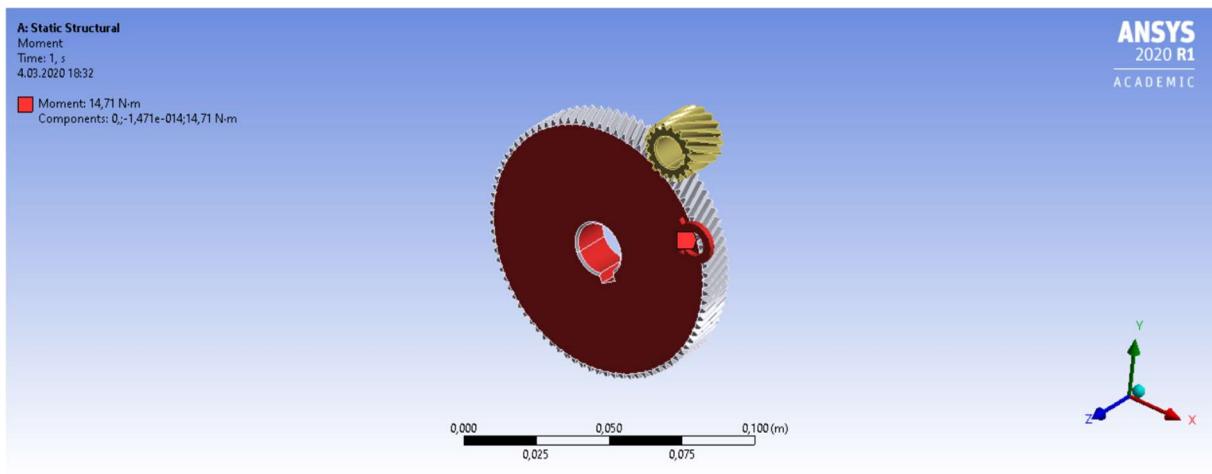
Rotor Engine Input Shaft-Z1
